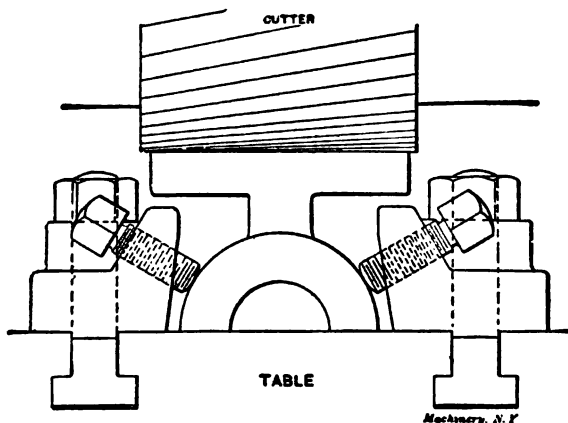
Simple Holding Device used when Slab Milling the Lower Surface of the Base
